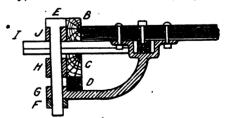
SECTIONAL VIEW THROUGH KING BOLT.
